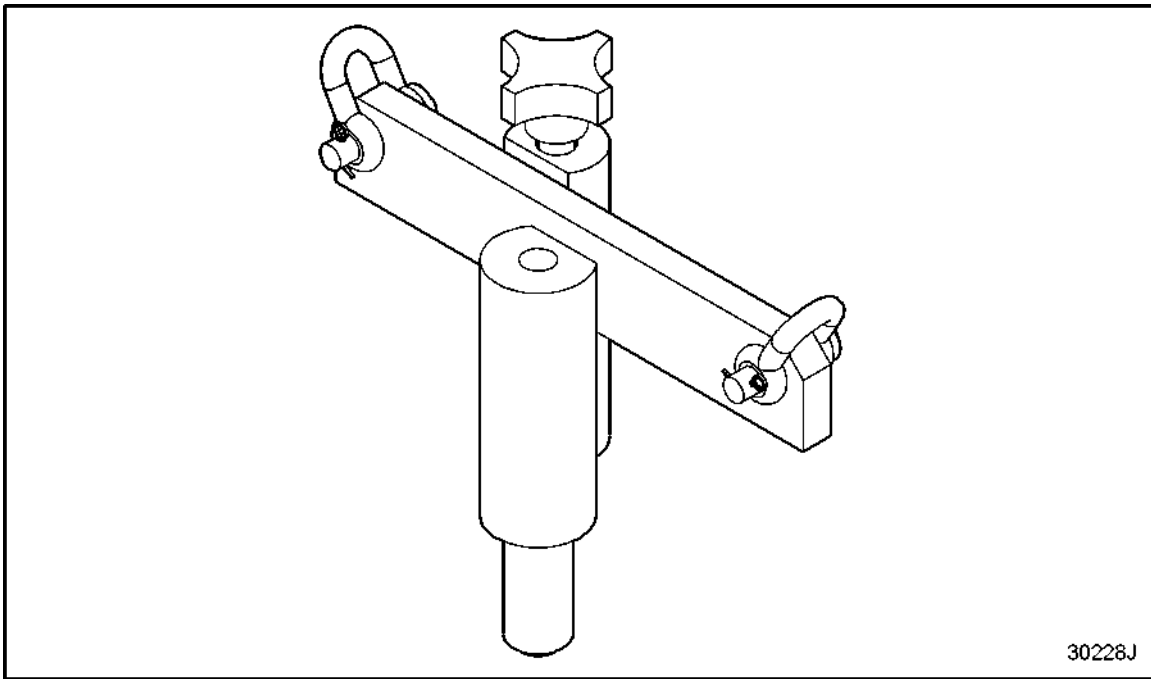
Cylinder Head Lifting Fixture,J 42730
